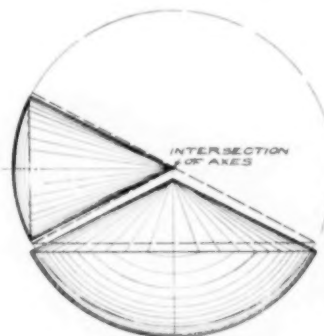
EFFECT OF AXIAL ADJUSTMENT OF THE PITCH CONES OF A PAIR OF BEVEL GEARS
